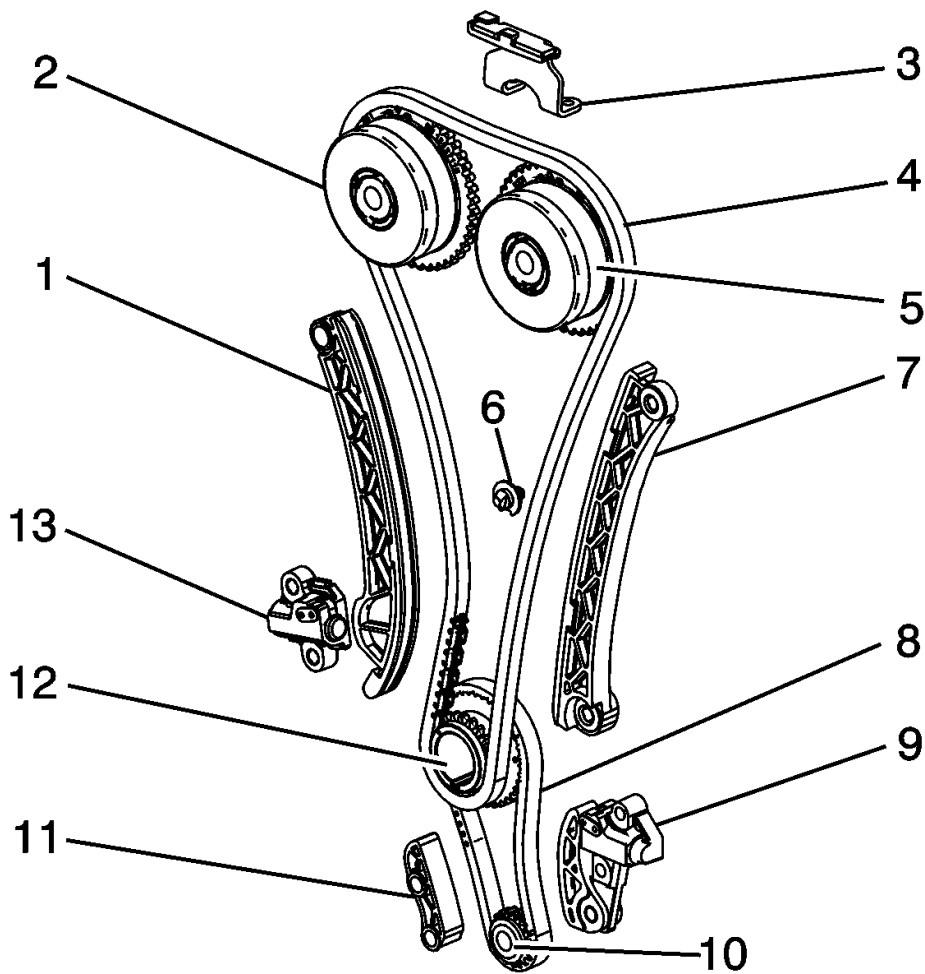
Camshaft Timing Chain, Sprocket, And Tensioner
